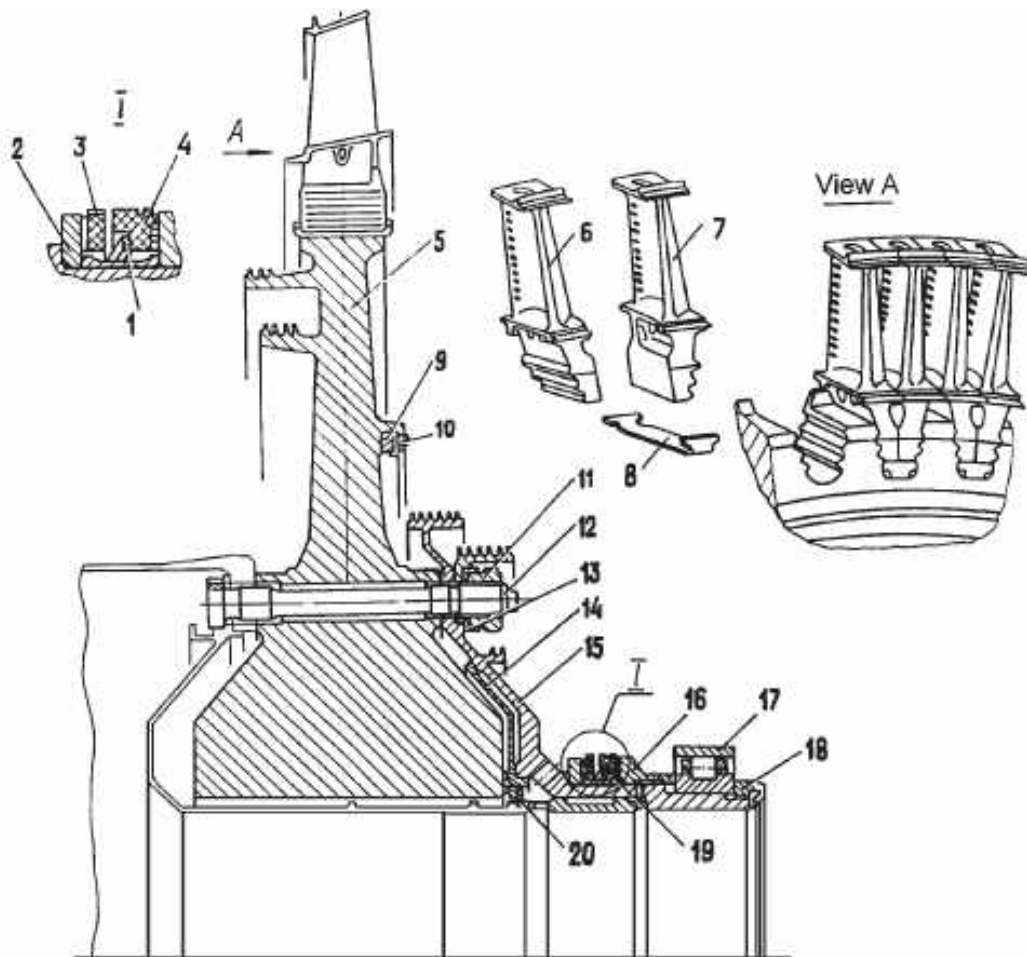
Rotor of TFE D-36: 1 - spring; 2,16 – thrust rings; 3 – ring; 4 – seal ring; 5 – disk; 6 – rotor blade (right); 7 – rotor blade (left); 8 – locktab; 9 – counterbalancing weight; 10 – locking; 11, 18 – nuts; 12 – coupling bolt; 13 – locking spacer; 14 – shield; 15 – rear shaft; 17 – roller bearing; 19 – bush; 20 – sealing ring
